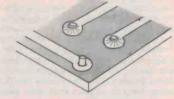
Alternatively, the leads may be cut so that they protrude a short way, and then soldered. They may be cut off after soldering if you wish.
